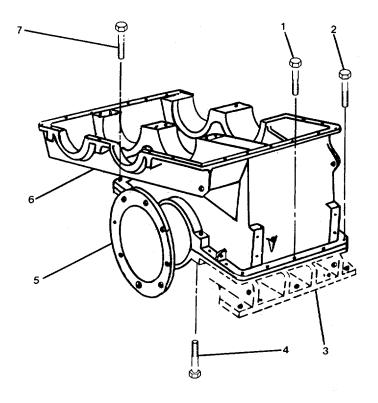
Middle Casing and Output Shaft Replacement
